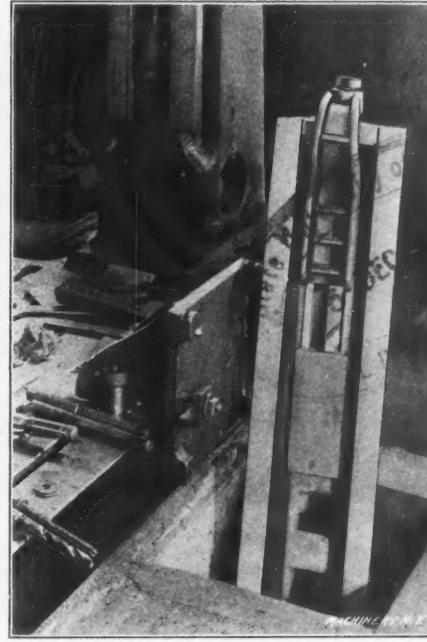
Bracket used in Holding the Shaper Ram on the Drill Press
